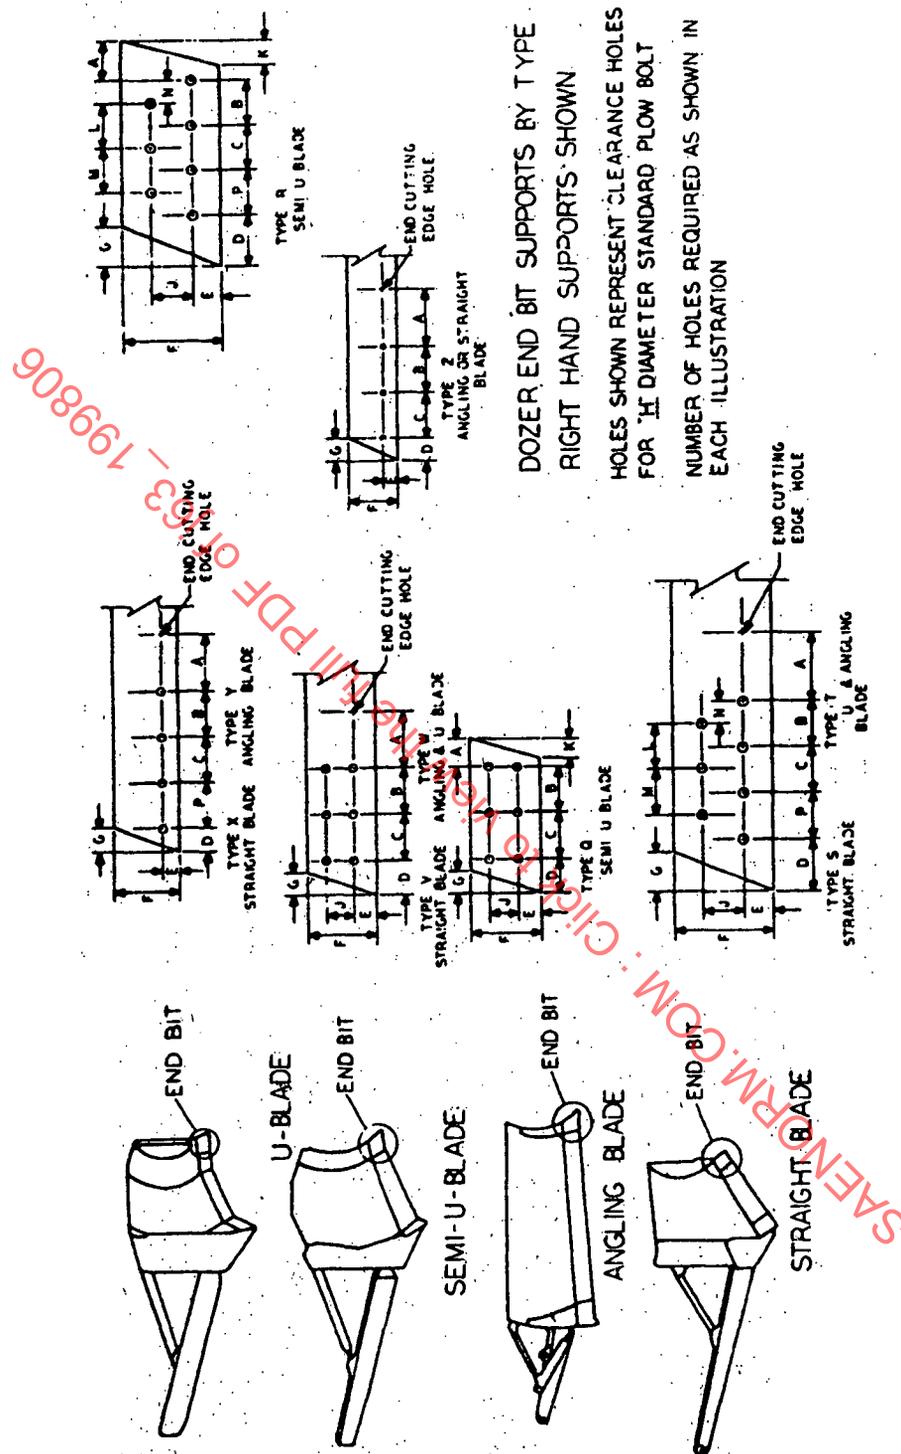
B—DOZER END BIT MOUNTING BOLT PATTERN (CONTINUED)
